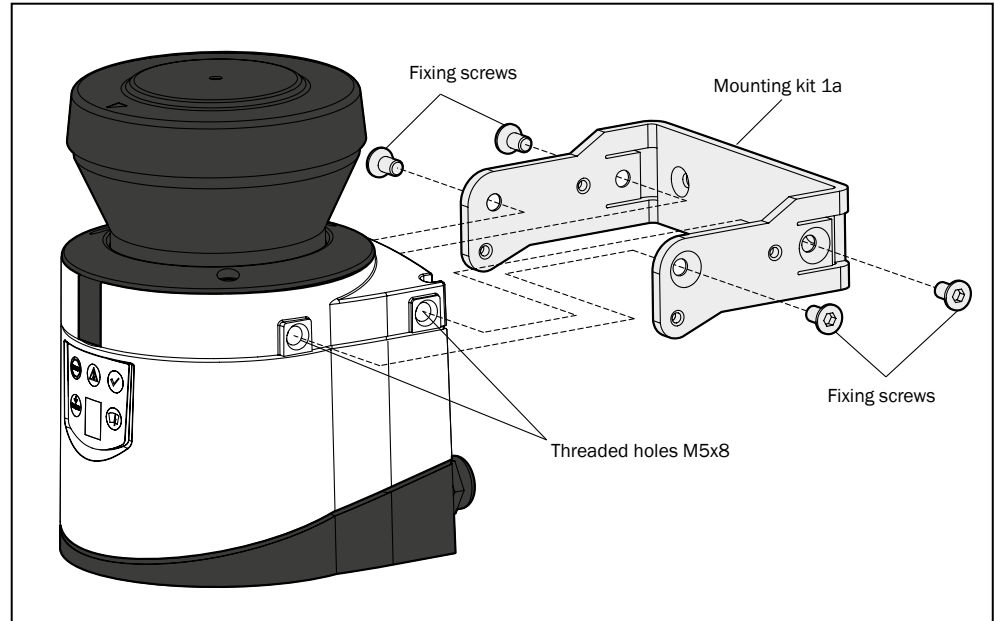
Mounting with mounting kit 1a (part no. 2034324)
